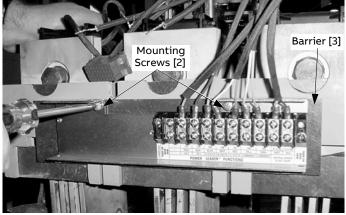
New terminal board [1] installed on a 2500–4000 A breaker.
